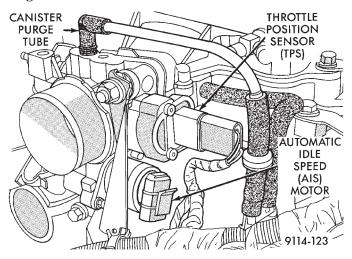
Electrical and Vacuum Connection to Throttle Body
